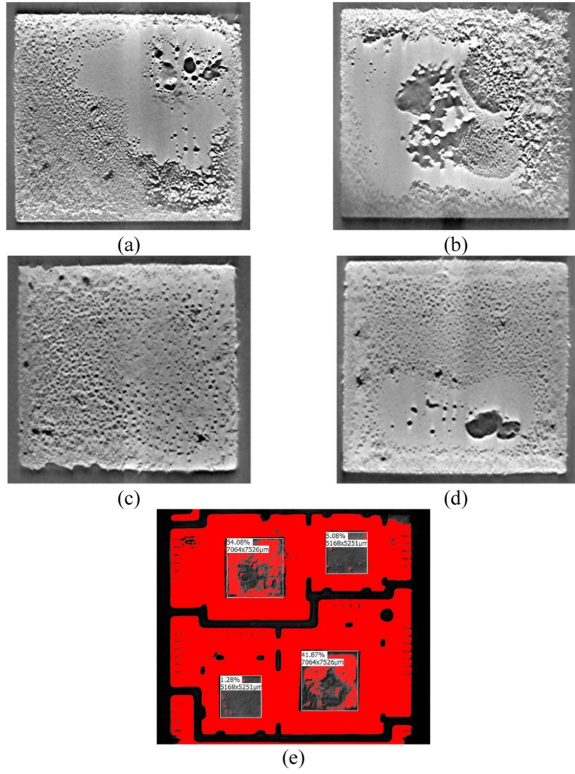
Scanned results. (a) DUT50-3 solder layer. (b) DUT50-4 solder layer. (c) DUT50-5 solder layer. (d) DUT100-1 and DUT100-2 solder layers. (e) DUT150-1 solder layer.
